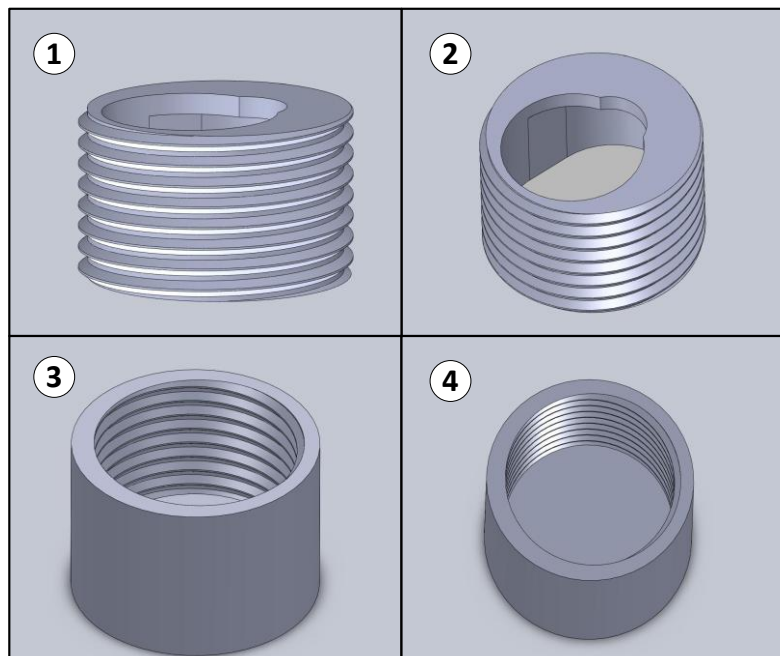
(1&2) Here the attachment is threaded. (3&4) This is an example of the small female cap with threads.
